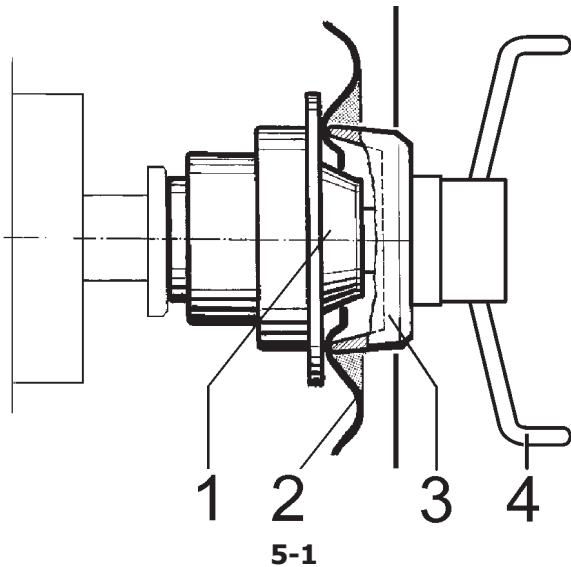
Clamping adaptor to clamp centre bore located car wheels
